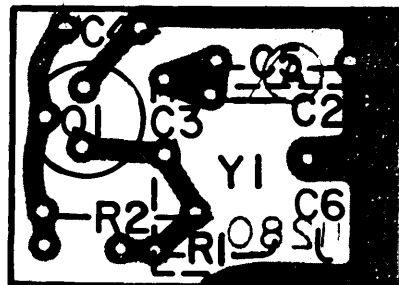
Part 11280-6 Crystal Marker Module (A3A1A3), Location of Components
